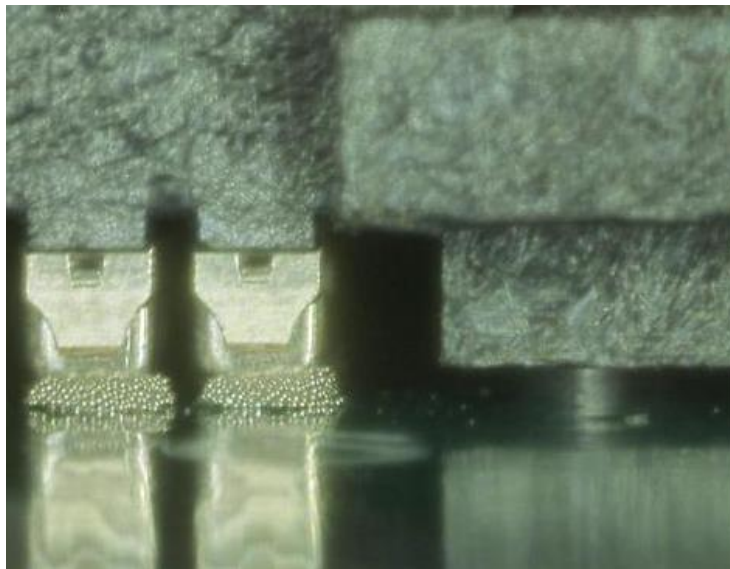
Solder charge location relative to solder print. Notice good contact between solder charge and paste.
